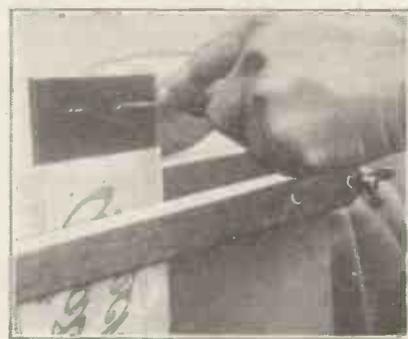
Cutting a Slot, showing the holes being drilled close together.
